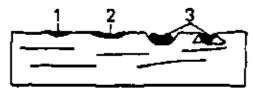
Enlarged cross–section of a board with filled pores 1 well filled, 2 incompletely filled, 3 incompletely filled and badly adherent
